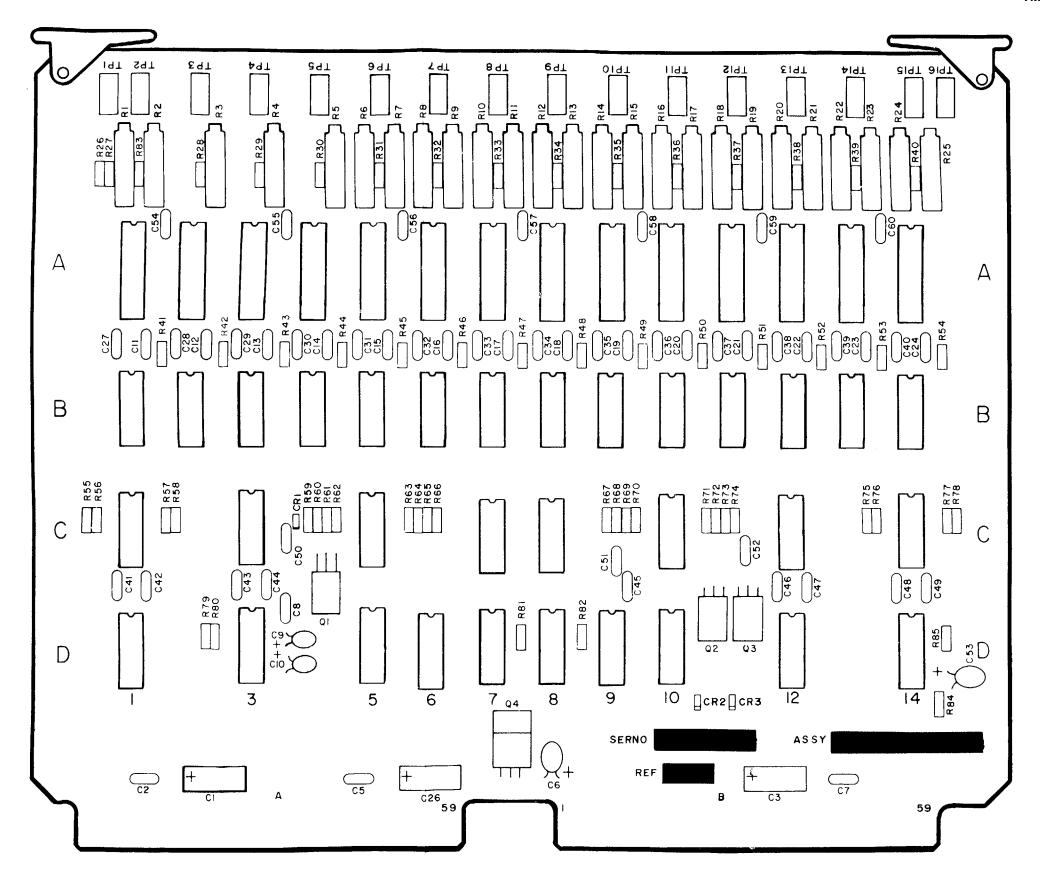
Reference Board 0100-2708 Assembly Drawing
